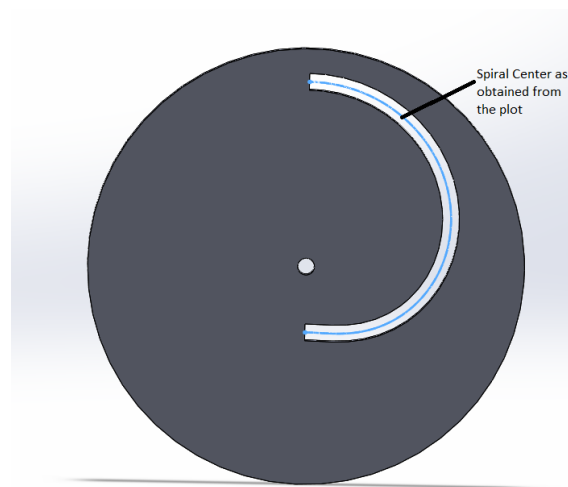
CAD design of a hollow spiral groove carved on a wheel (diameter =13 cm).
